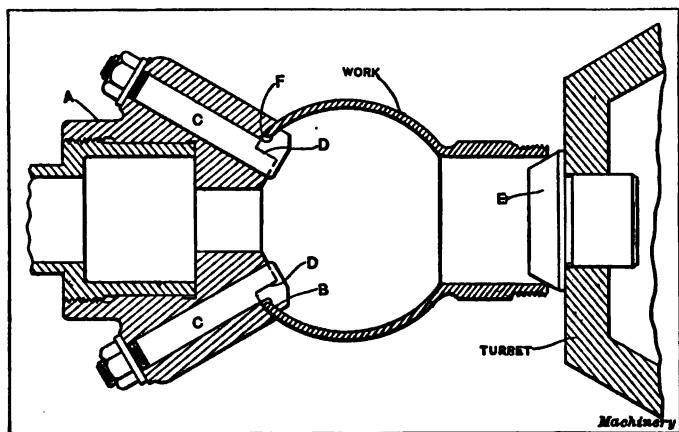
Fixture for Ball-and-socket Pipe Joint
